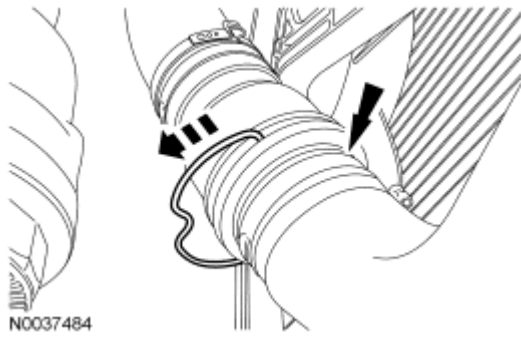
Removing Retaining Clip And Locating Lower Radiator Hose
